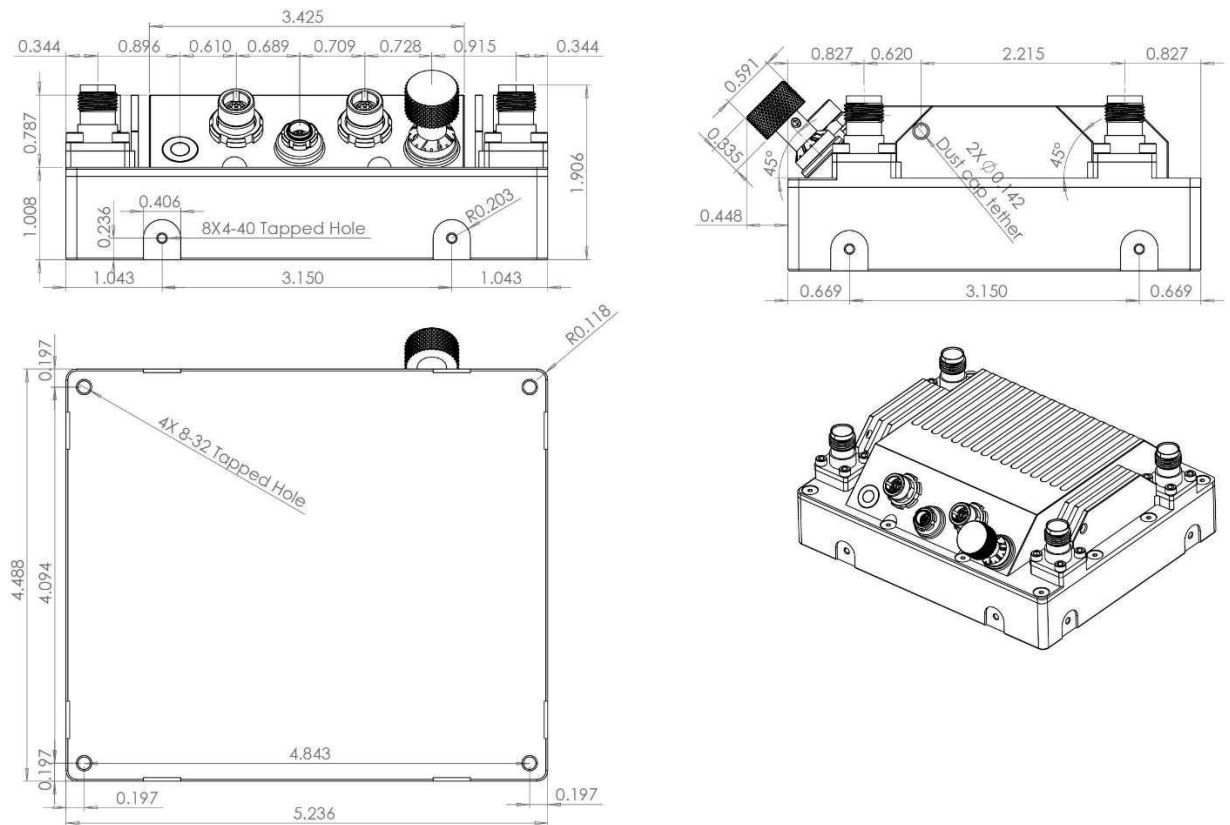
SC4400E Mechanical Drawing (top) and Mounting Pattern (bottom)
